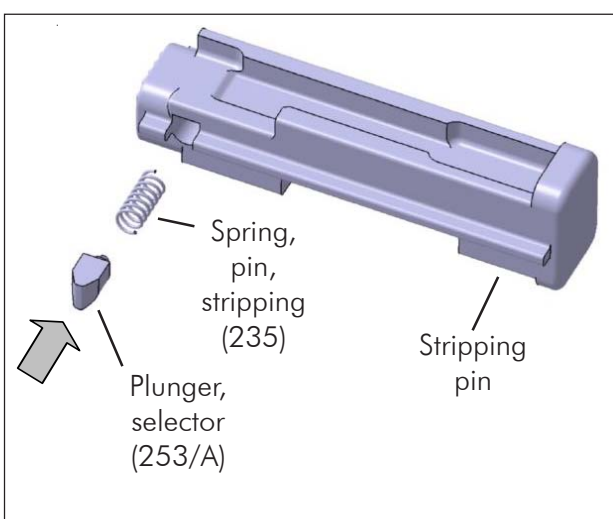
ab - Reassembly of the plunger, selector (253/A) and the spring, pin, stripping (235)
